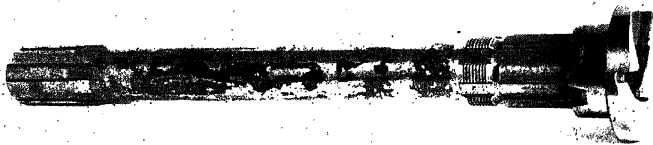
Starter shaft fitted to the rear half of the B.M.W. 132K crankshaft.
